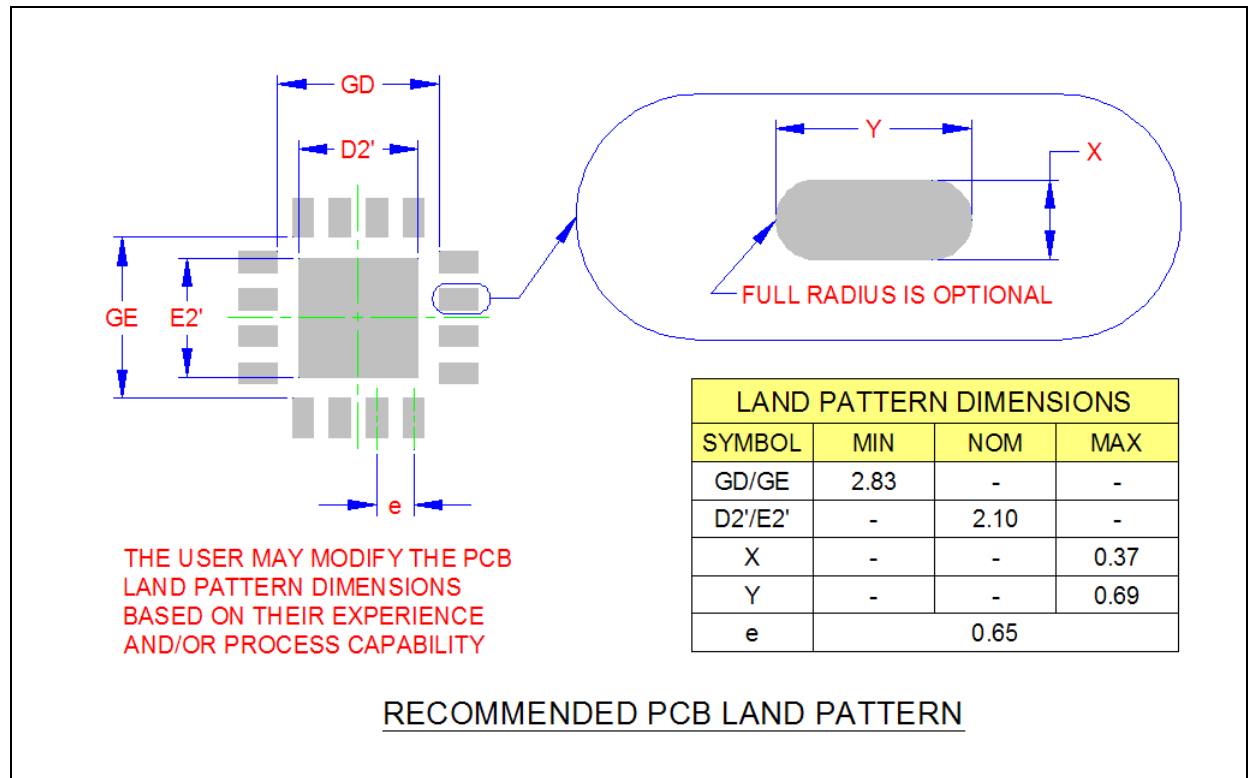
16 pin QFN 4mm x 4mm PCB Footprint
